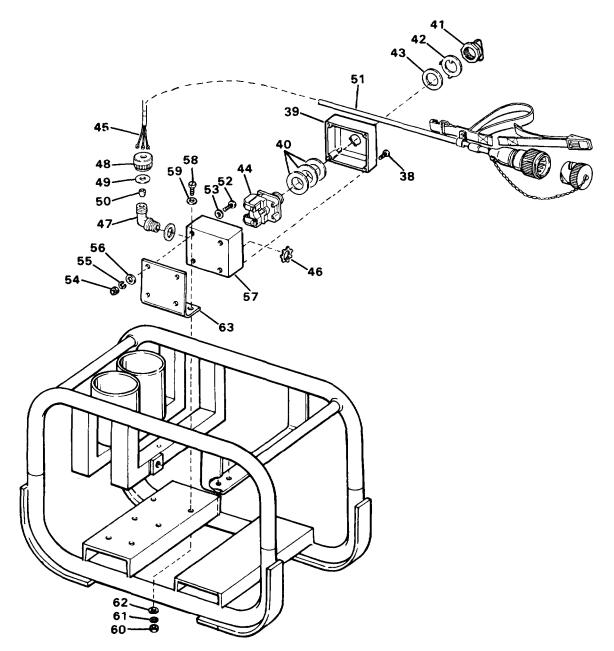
Distribution Pump and Motor Assembly (sheet 4 of 5)
